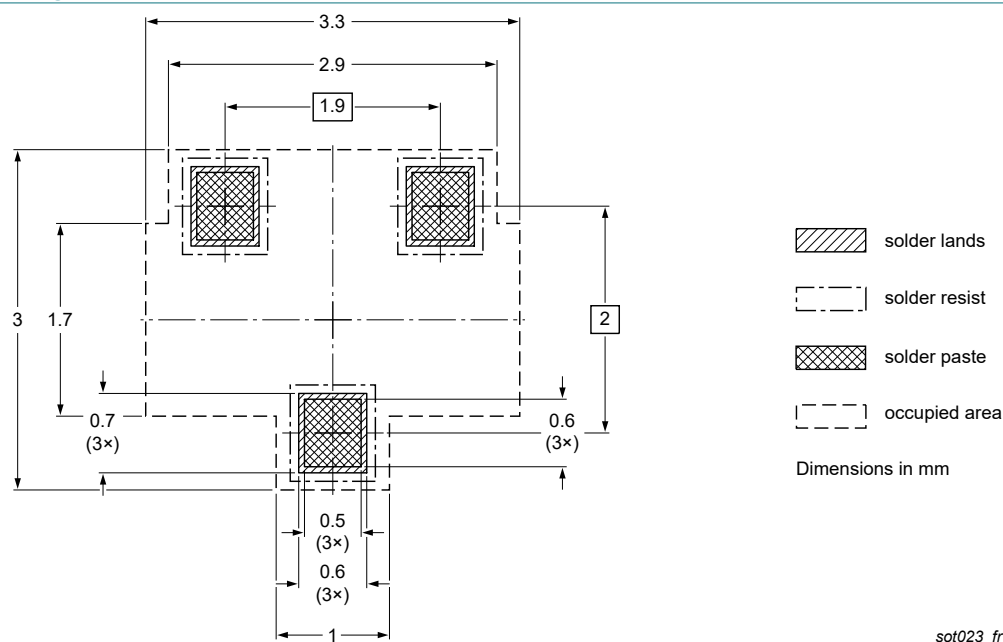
Reflow soldering footprint SOT23 (TO-236AB)
